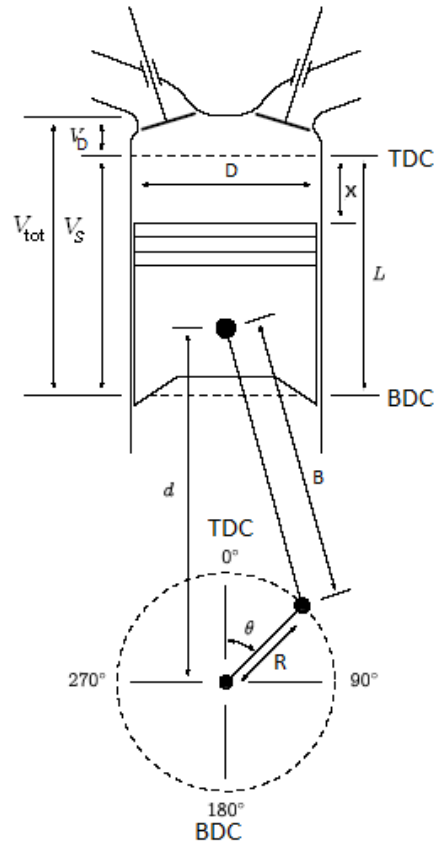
Sketch of the set cylinder, piston, connecting rod and crankshaft
